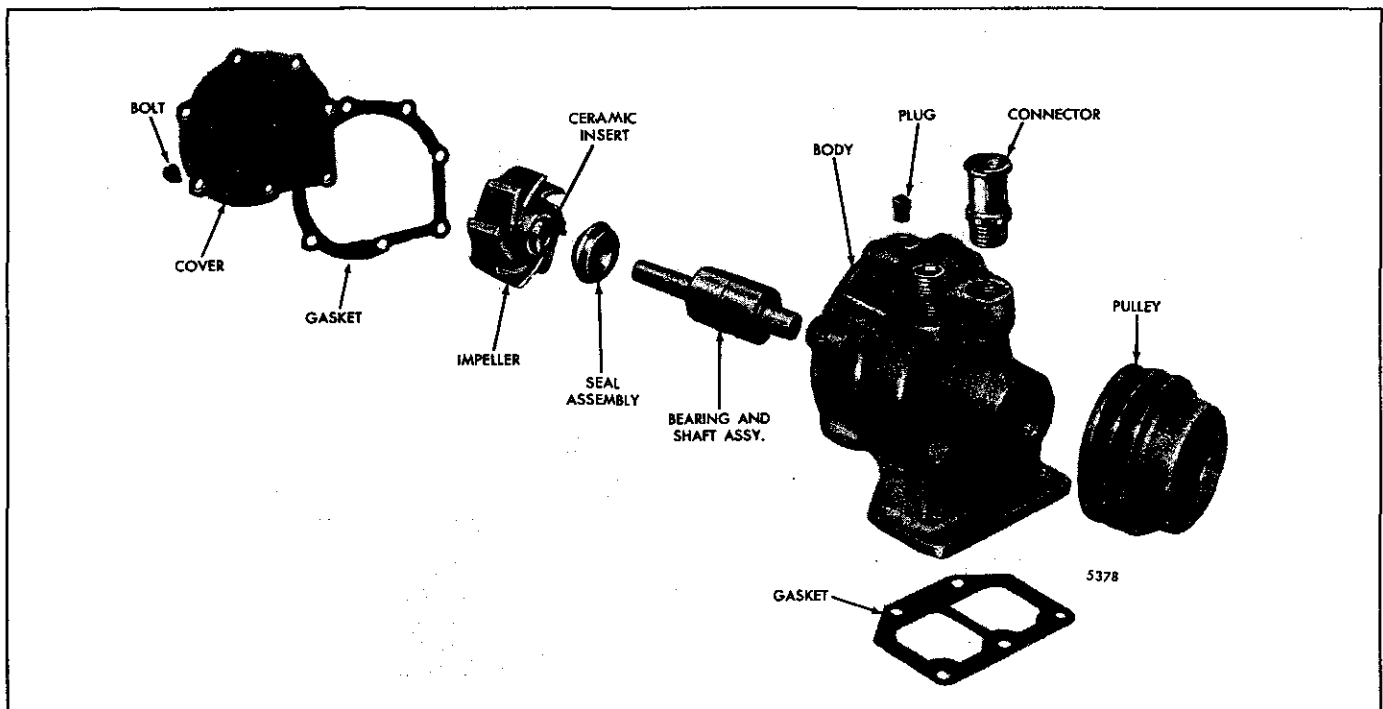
Details of Current Water Pump Assembly with Ceramic Seal
